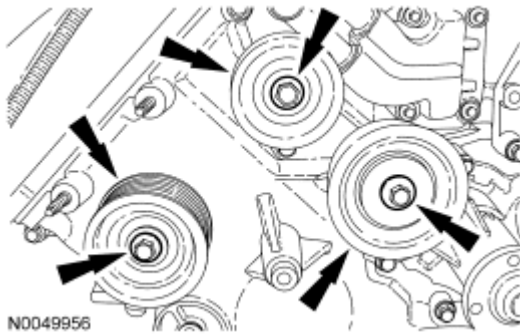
Locating SC Drive Belt Idler Pulley Bolts
